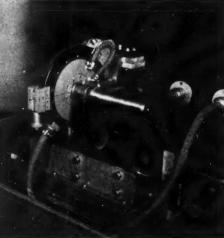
Crankshaft bearing surfaces may be hardened by means of a split-type coil. (Courtesy Induction Heating Corp.)
